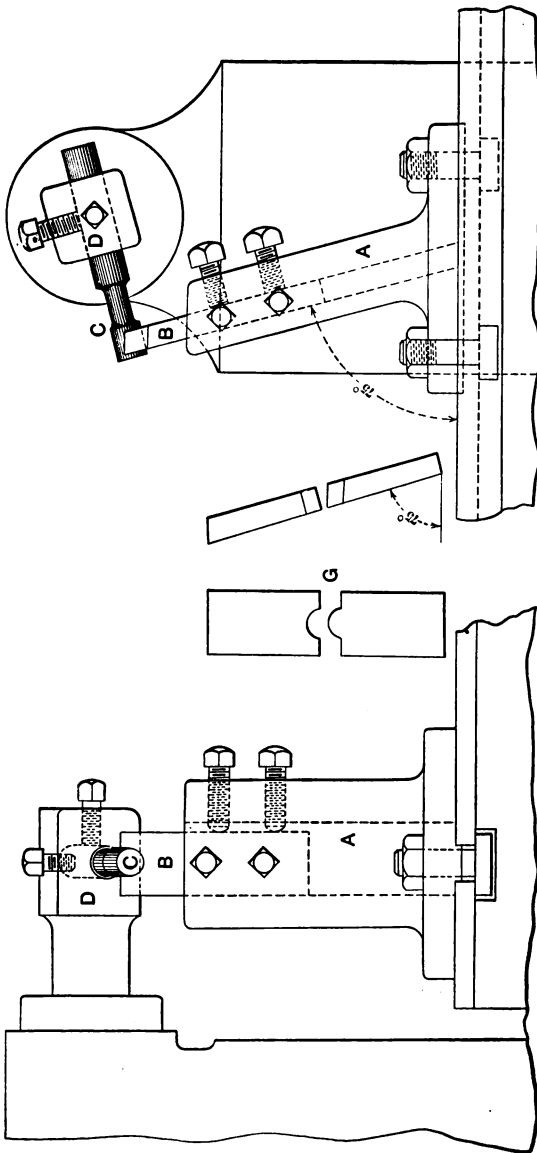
Making a Concave Forming Tool in the Milling Machine
